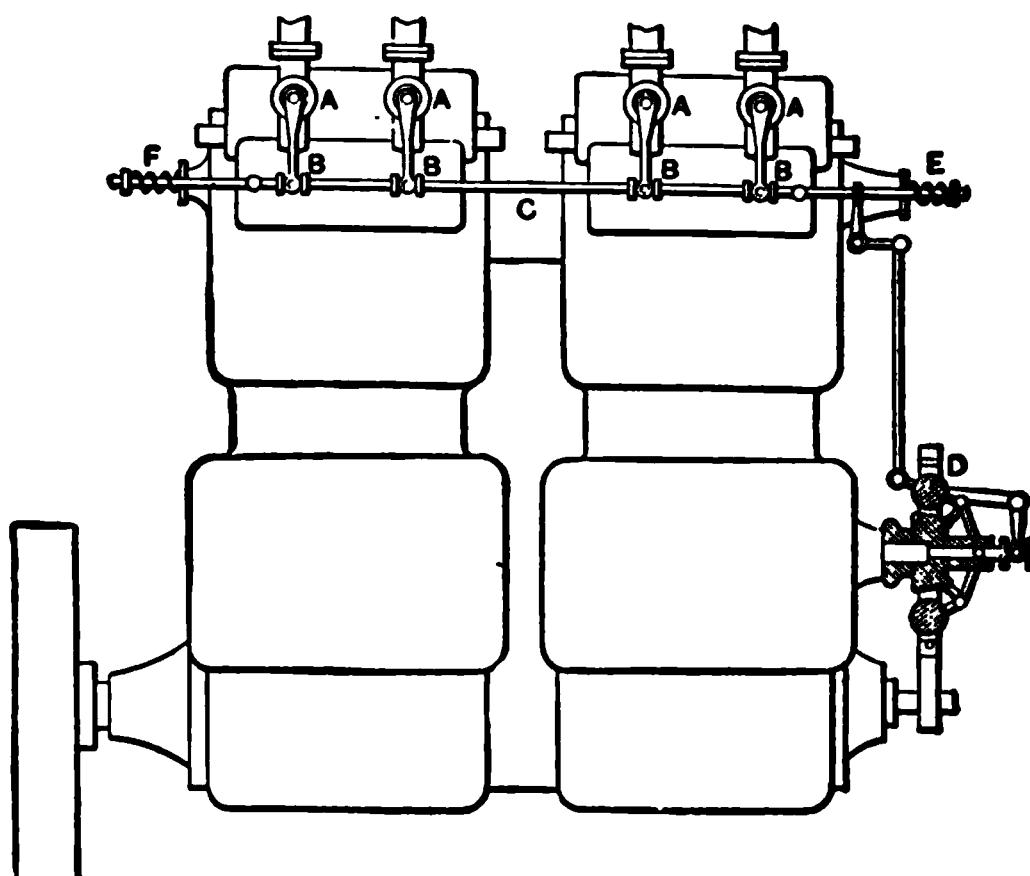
Diagram of Volume Throttling Device on the Mors Engine. *A* and *A* are throttle valves on the inlet pipes; *B* and *B*, valve levers; *C*, valve shaft, under control of the governor, *D*; *E* and *F*, springs, used either singly or together, according to control, so as to vary the opening of the inlet. System like the Duryea.
